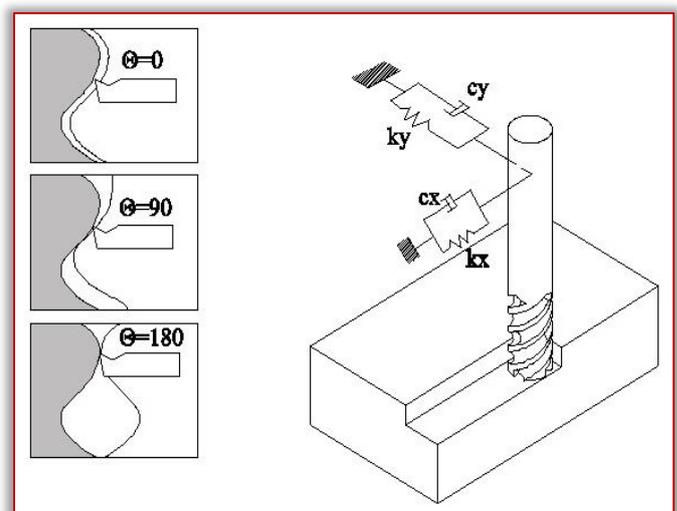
Regenerative chatter in milling. Initial tool deflection copied to workpiece surface is encountered in the next tool revolution
